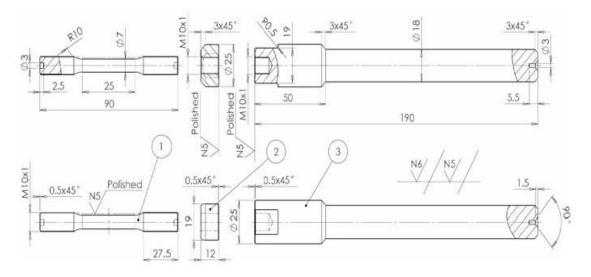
Specimen and specimen holder for testing LCF of steel NN-70 [8]. Item 1, LCF specimen, NN-70, D = 7 mm; item 2, Jam nut, 42CrMo4; item 3, Grip holder, 42CrMo4.
